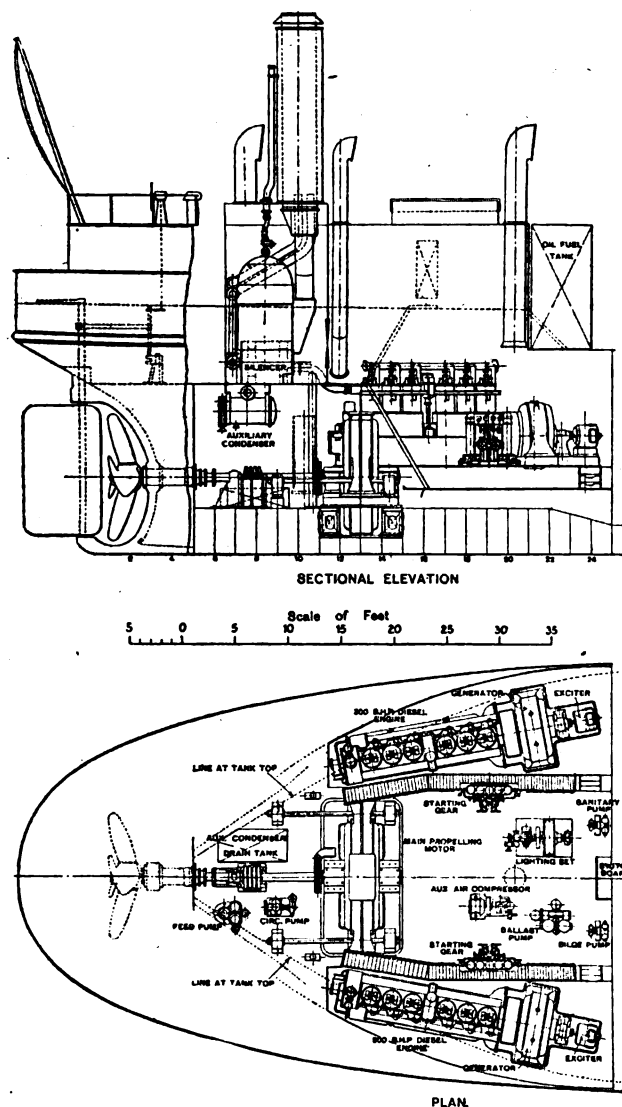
GENERAL ARRANGEMENT OF PROPELLING MACHINERY.
